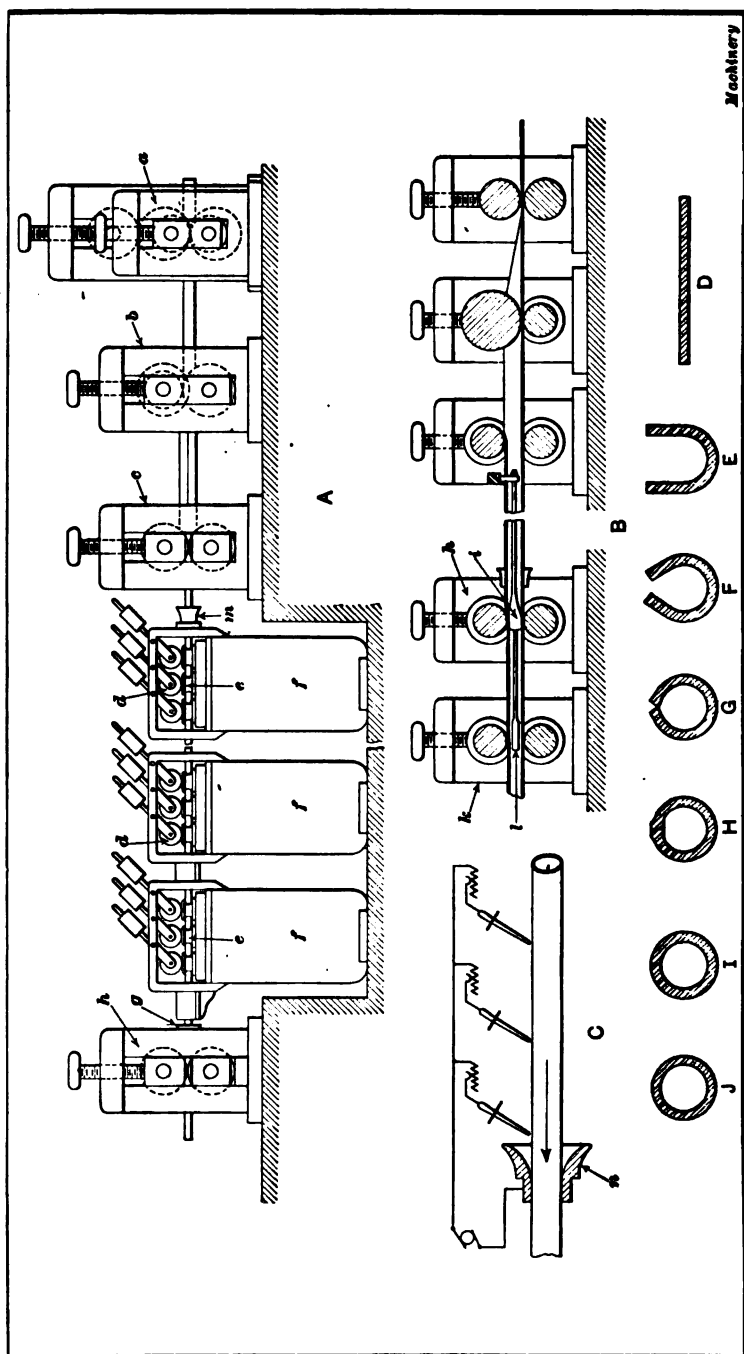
Diagram illustrating Special Electric Welding Process used in converting Strap to Electrically Welded Tubing in One Continuous Operation at the Rate of 400 Feet per Minute
